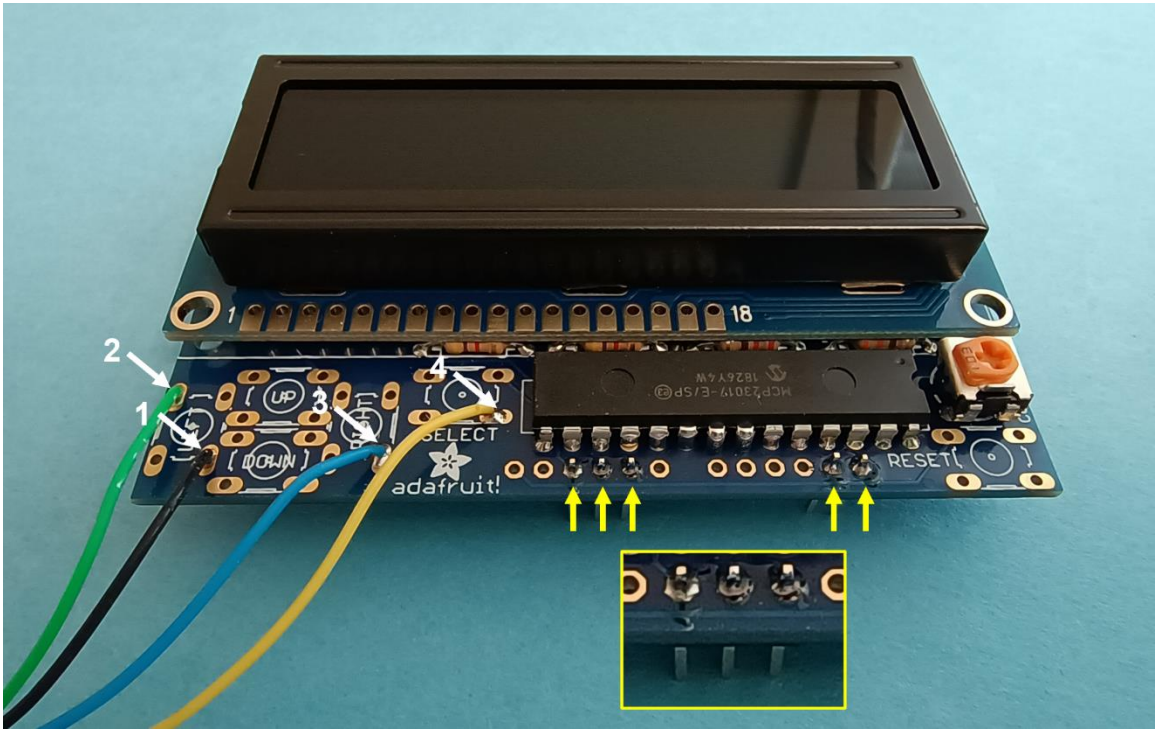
LCD Shield Assembly Modified for OpenWater, with Jumper Wires Installed.
